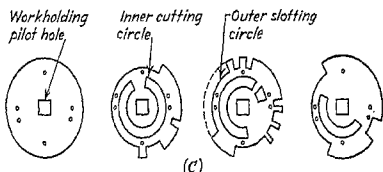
(Continued). Blank, typical finished parts, and die for punching master cams.
